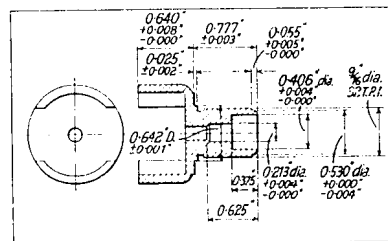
Details of the Operation Performed on the Windtone Horn Component
